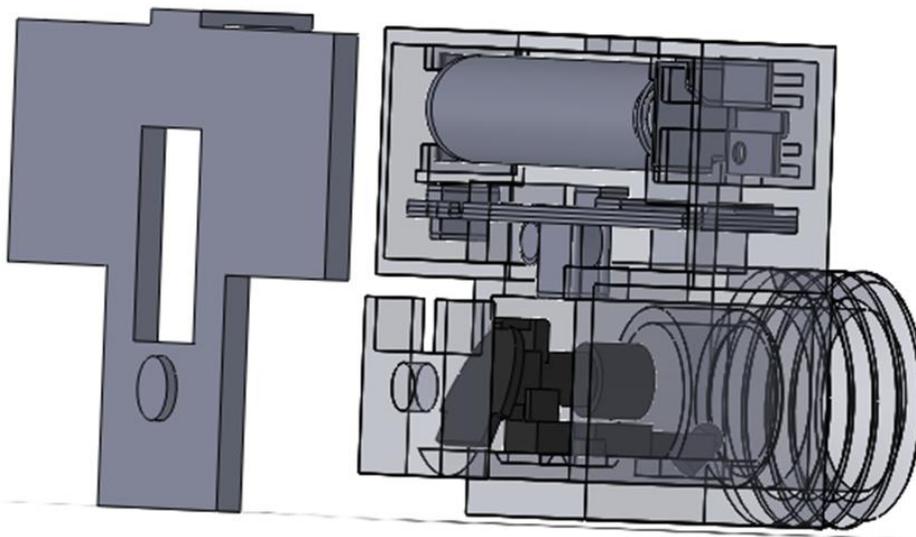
SolidWorks assembly of first prototype slip detection sensor casing.
